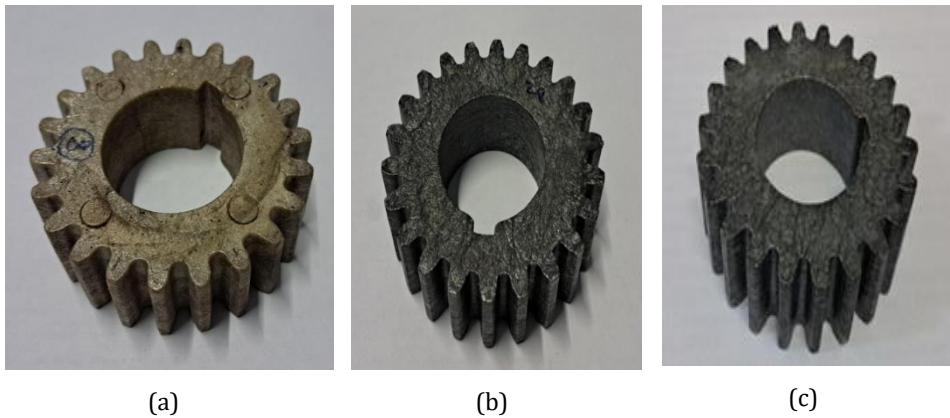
Gear images (a) PAEK gear, (b) PAEK+ MWCNT gear, (c) PAEK +Amine functionalized MWCNT gear
